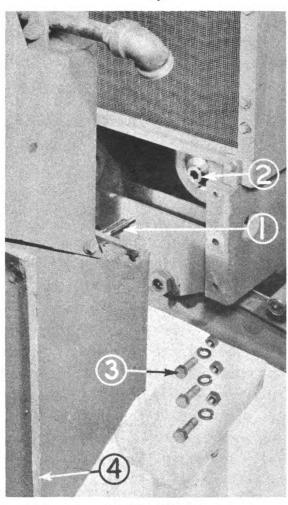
SERIAL NO. HU-20 to HU-173 INC.
